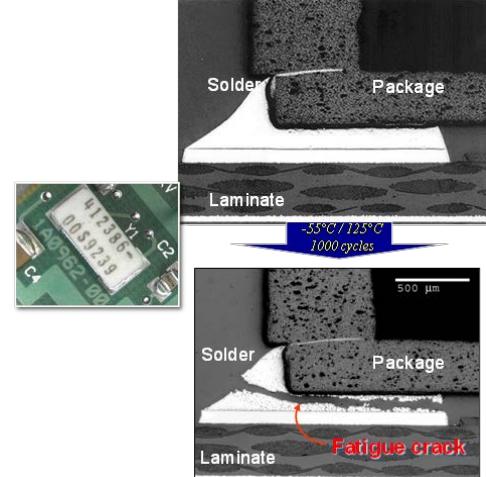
Cross section micrographs show the TMF crack in the solder joint of a surface mount component (-55°C/125°C; 1000 cycles).
